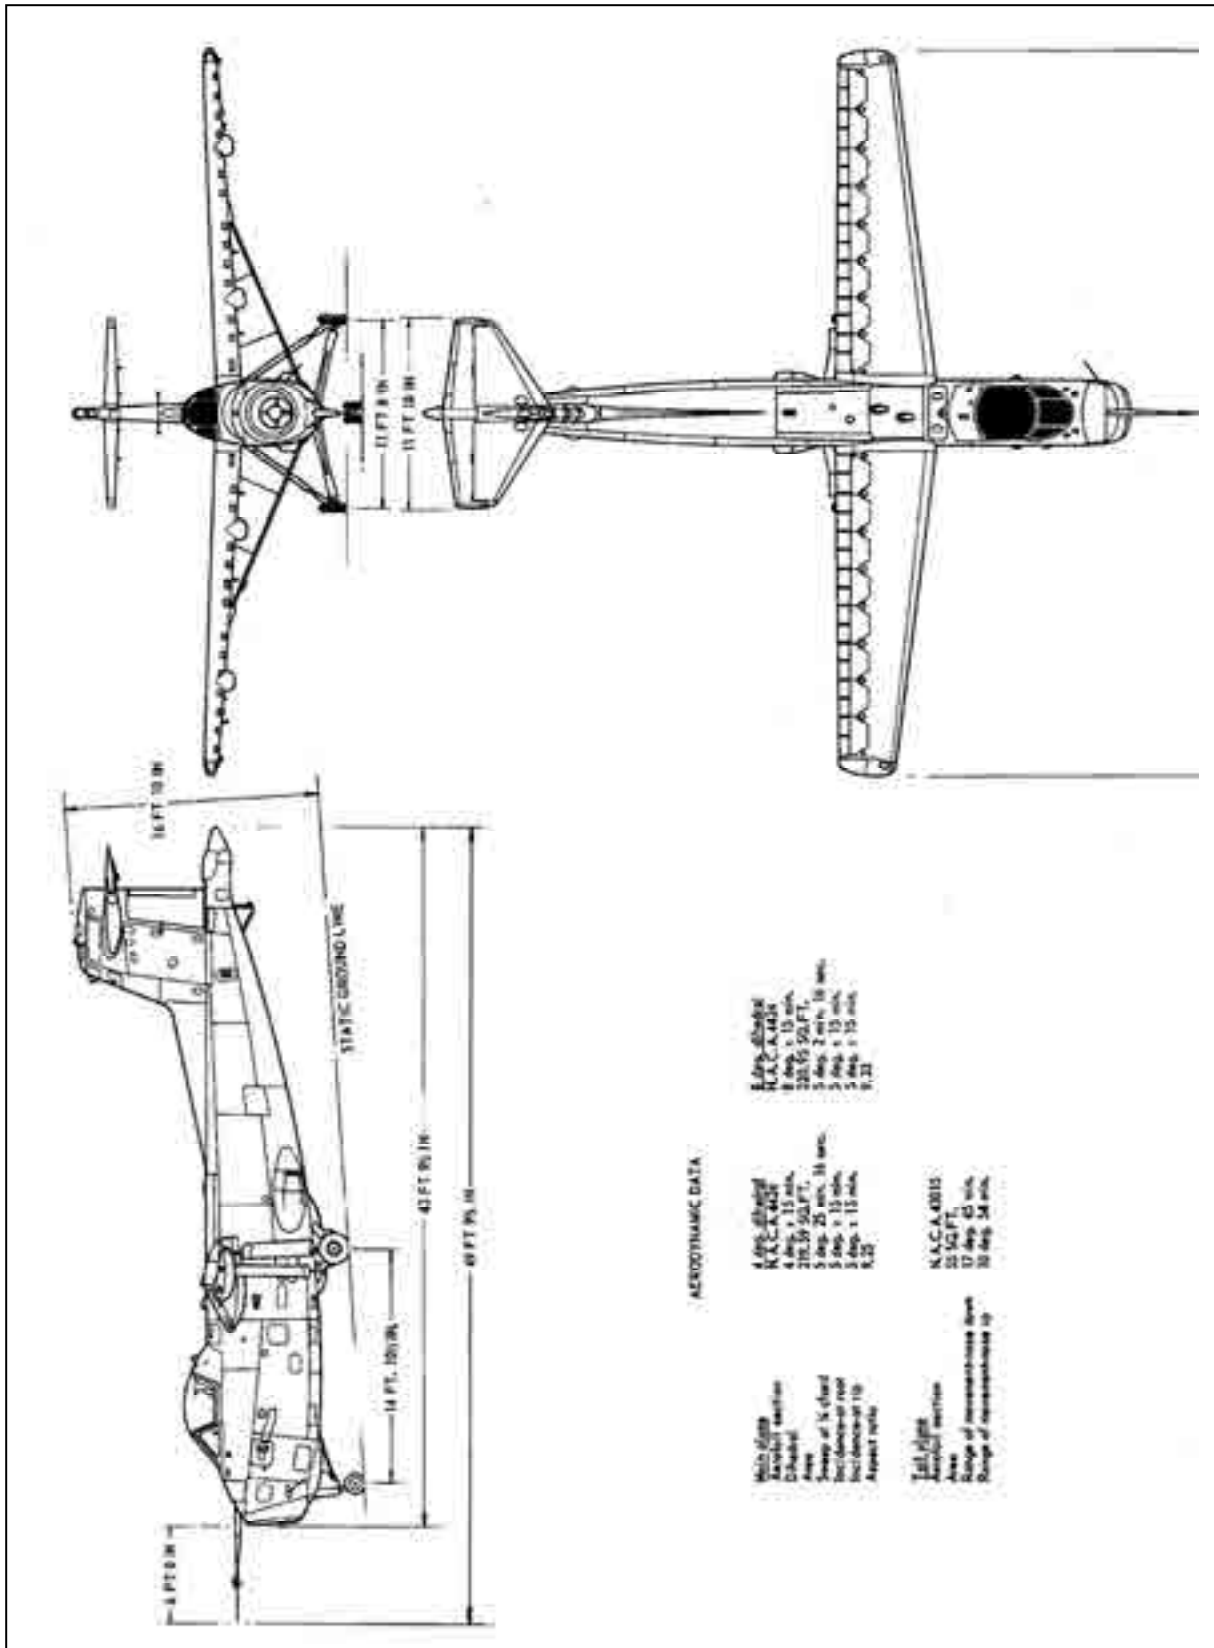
The Hunting H.126 three-view drawing [464].
